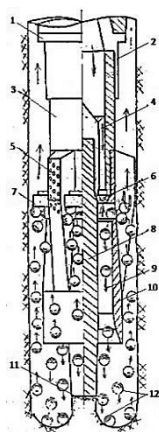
Ejector pellet impact drill bit with the nozzle and circular mixing chamber [5]
